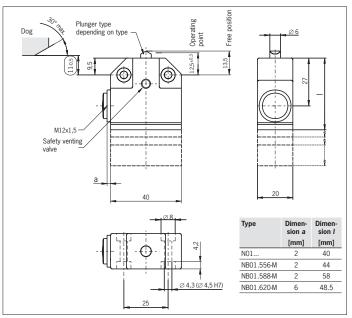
Dimension drawing for NO1.../NB01... with cable entry
